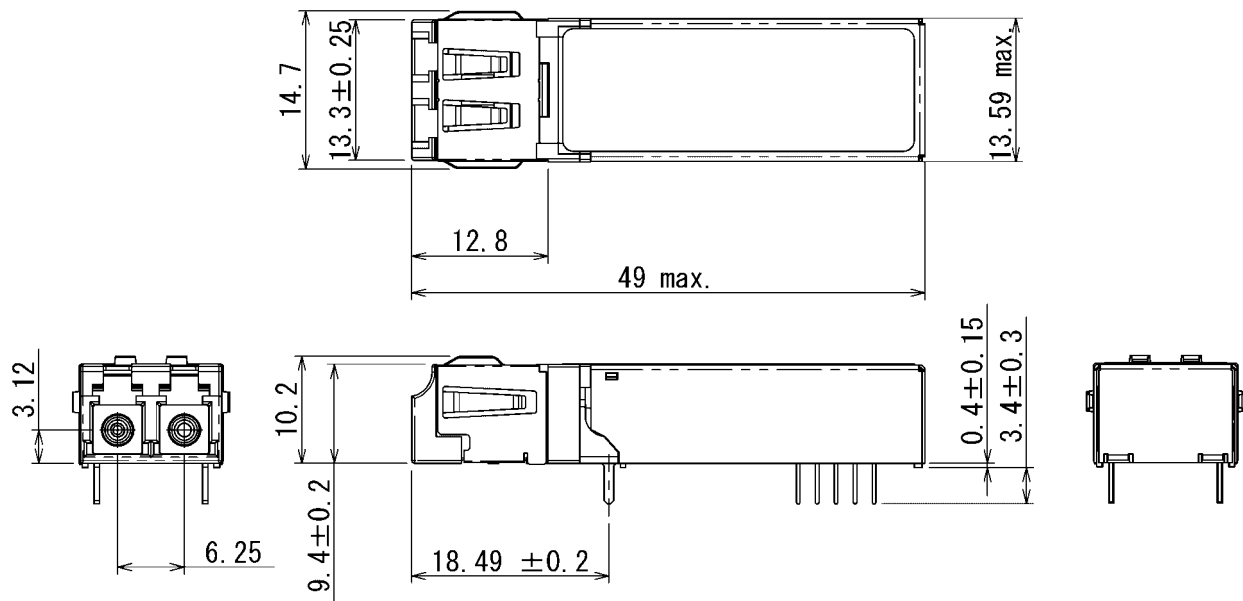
Outline Dimensions (SCM6405-JL-C#)
